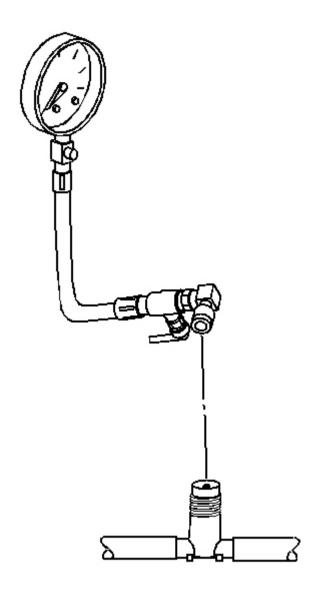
Identifying Fuel Pressure Gauge J 34730-1A Courtesy of GENERAL MOTORS CORP.
